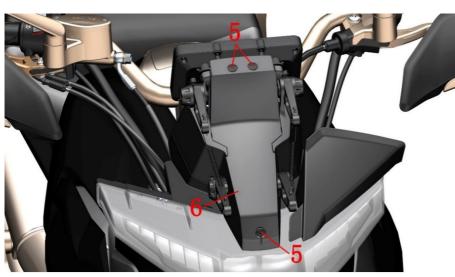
FRONT FORK COMPONENT		Windshield bracket component (Electronic Instrument)	CHK ADJ	0
